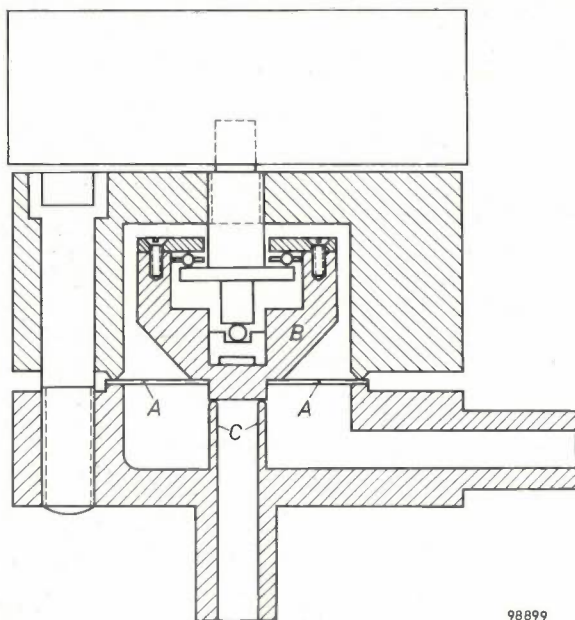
Small all-metal valve. *A* diaphragm, *B* copper block that can be pressed against steel tube *C*.
